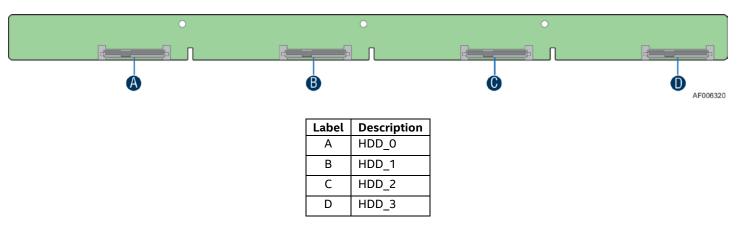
4 x 3.5" Drive Hot-Swap Backplane – front view
